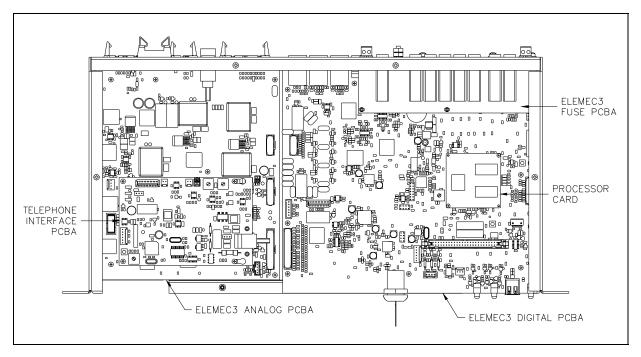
Elemec3* System Controller – Internal Components – Top View
